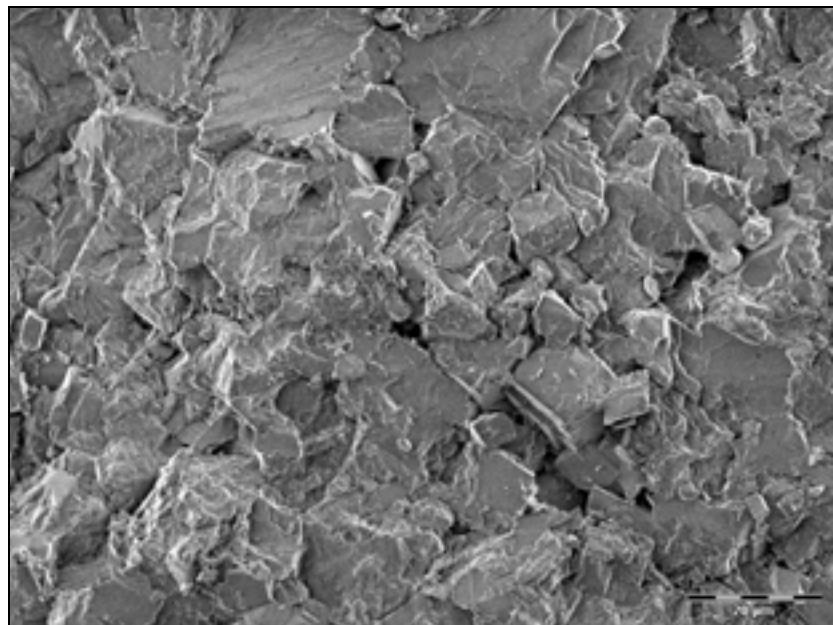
ESEM photo of fracture surface for type I.
